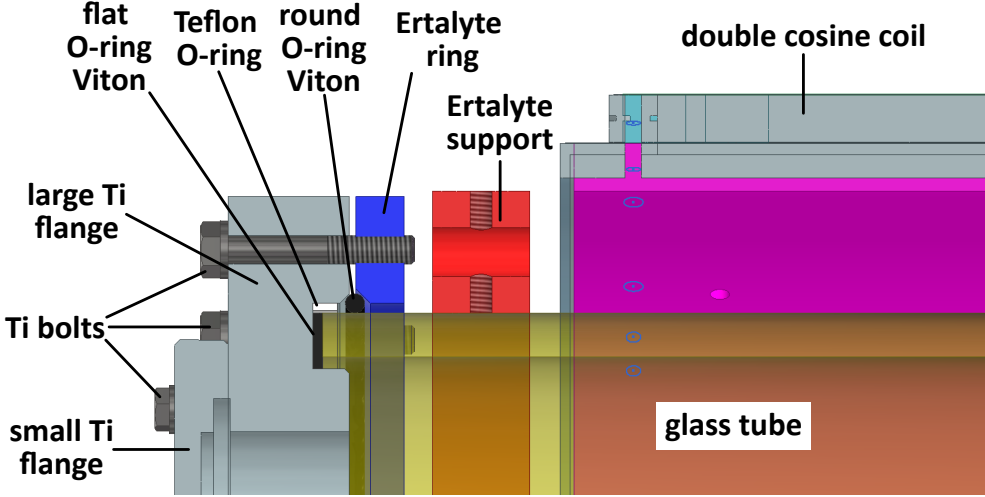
Drawing of titanium flange to glass tube fitting. The large titanium (Ti) flange is 3 cm thick.
